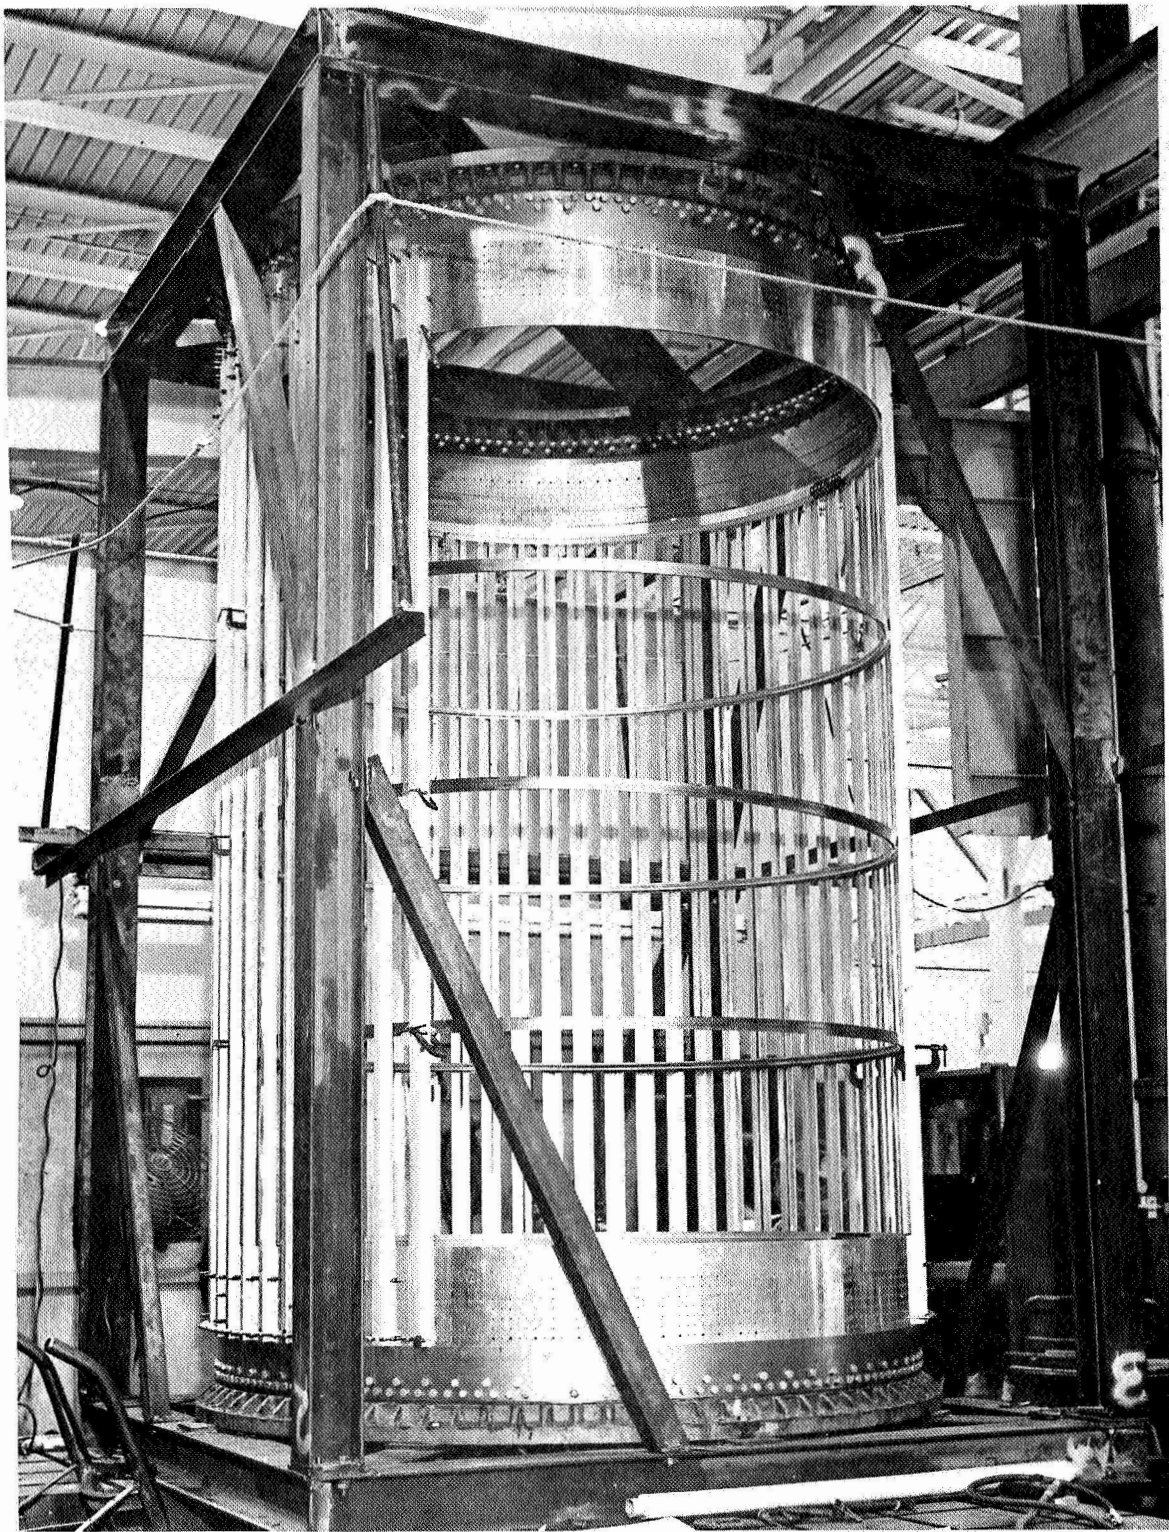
TRIAL ASSEMBLY OF RINGS AND STRINGERS
